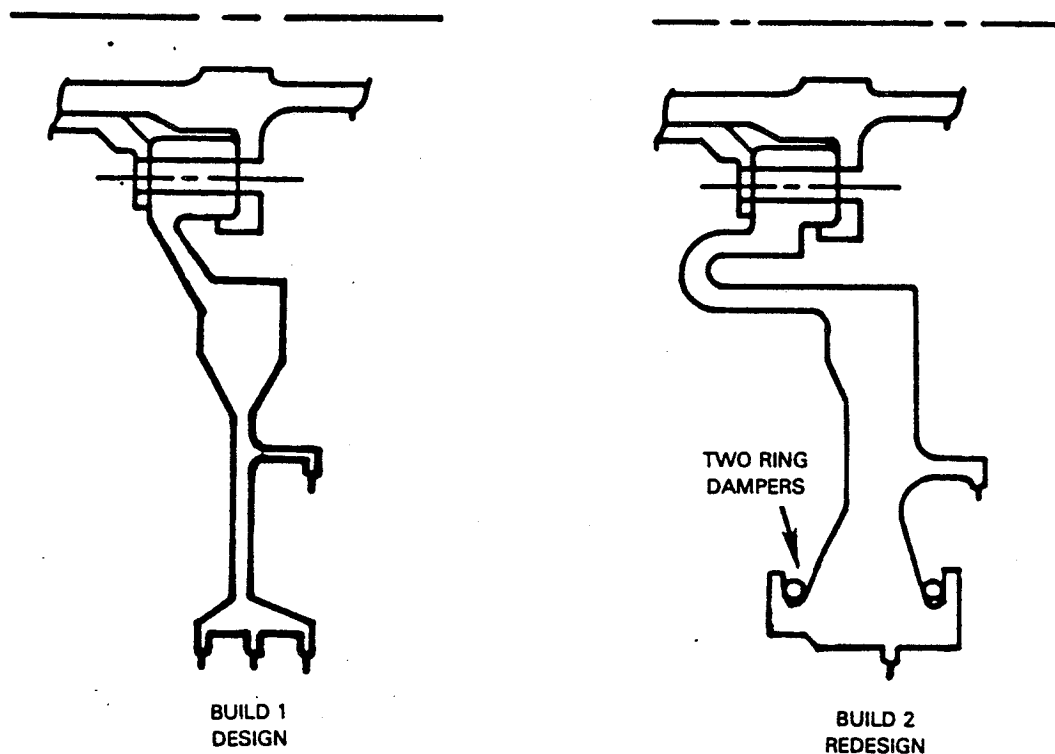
High-Pressure Compressor Rig Thrust Balance Seals, Showing the Original Build 1 Design and the Redesigned Build 2 Configuration
